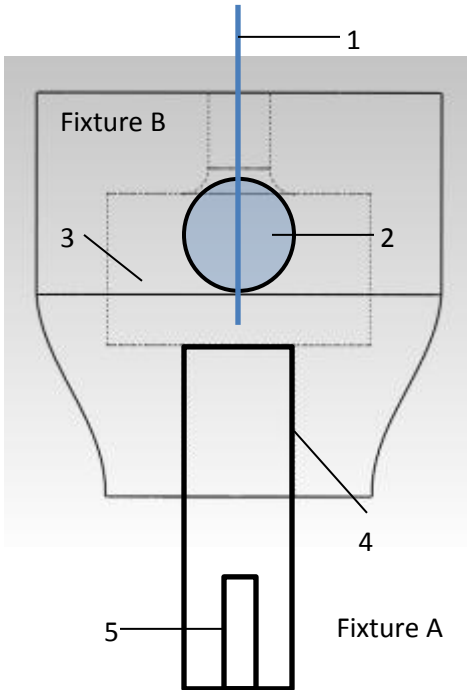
Fixture assembly allowing circular motion of tether. 1- Tether, 2- Hollow ball glued to tether and allowing its circular motion, 3- Hollow chamber, 4- 3/8"-24 thread mating fixture B to fixture A, 5- 10-24 thread mating fixture A to load cell
